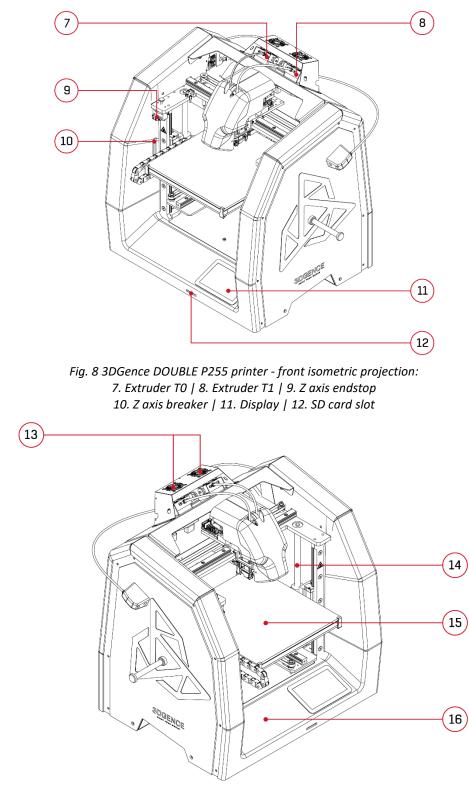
3DGence DOUBLE P255 printer - front isometric projection: 13. Extruder cooling fans | 14. Trapezoid bolt | 15. Heatbed 16. Cable carrier (Y axis)
